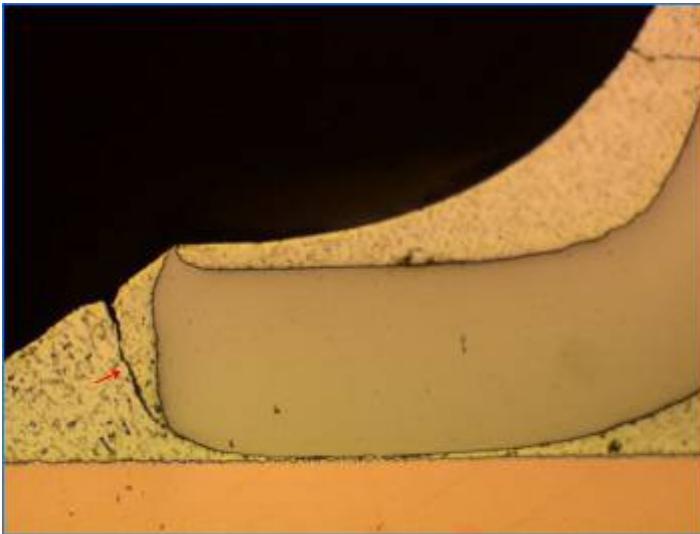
cross section, SN68, U16, left lead solder partial crack, 200xa
